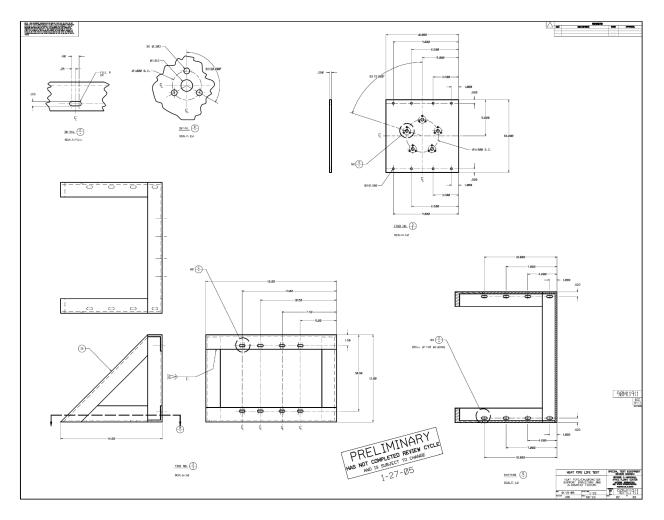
Attachment support structure details (Dwg. No. 90M11911).
